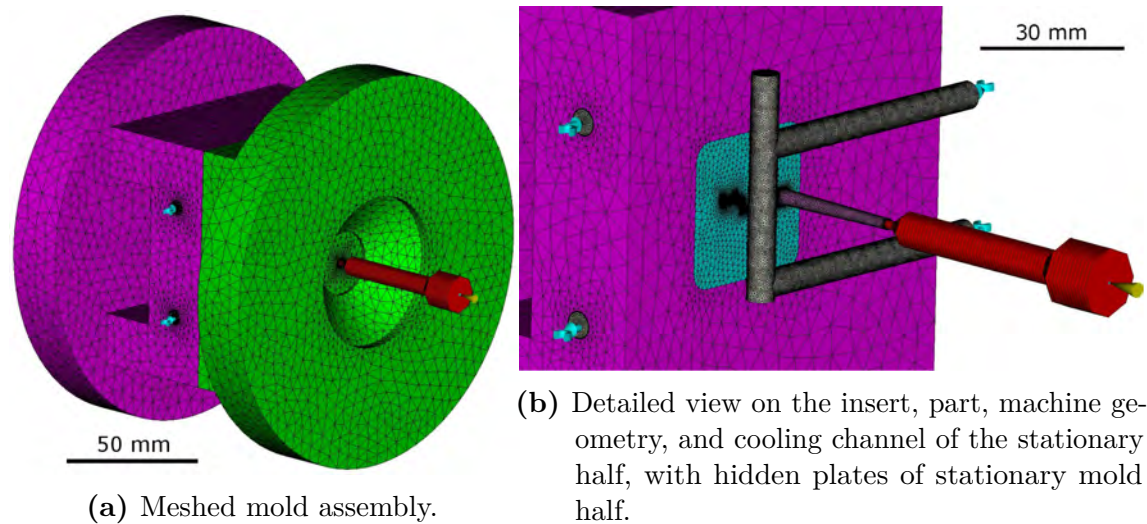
Meshed part and mold assembly with indicated machine geometry modeled as hot runner beam elements. The mesh is based on a simplified version of the mold block.
